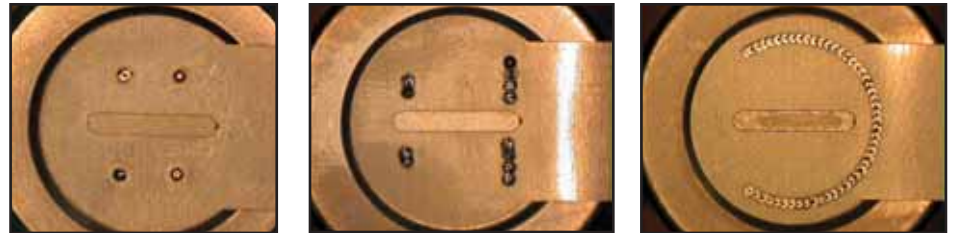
Examples of flexible weld placement for tailoring weld strength and weld strength and direction of weld strength can be tailored to pack requirements. The peel strength of (a) and (b) is 15 lb and 60 lbs respectively.
